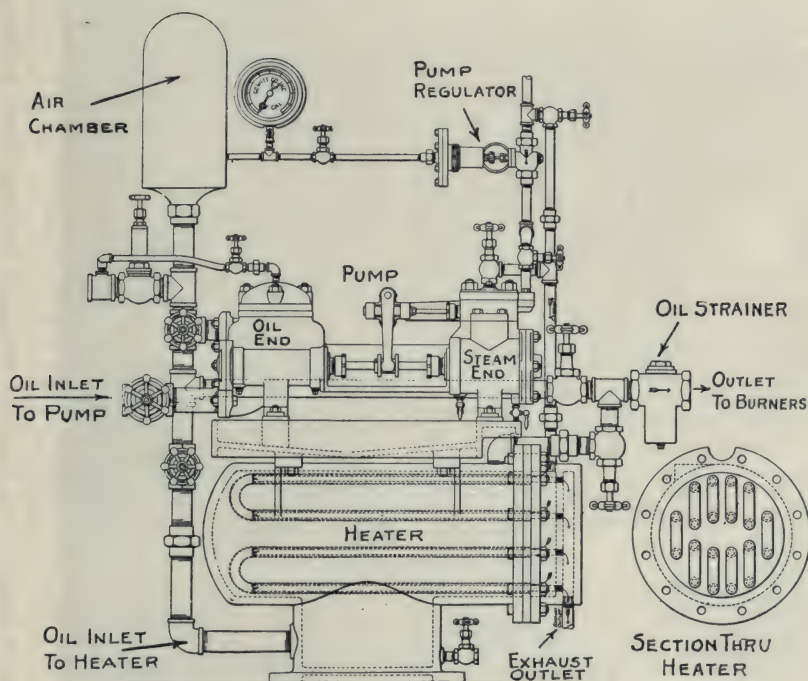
Witt Oil Pumping Set with Condensing Type Heater.
